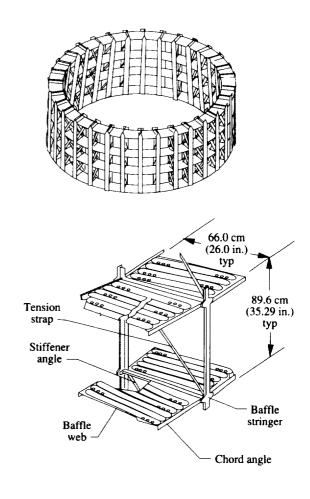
Slosh baffle assembly details. (Adapted from ref. 1.)
